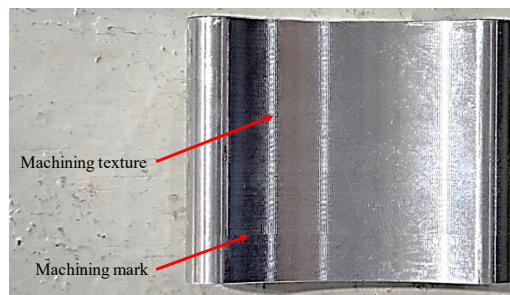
Machining mark left on the airfoil during fabrication (CNC milling)
